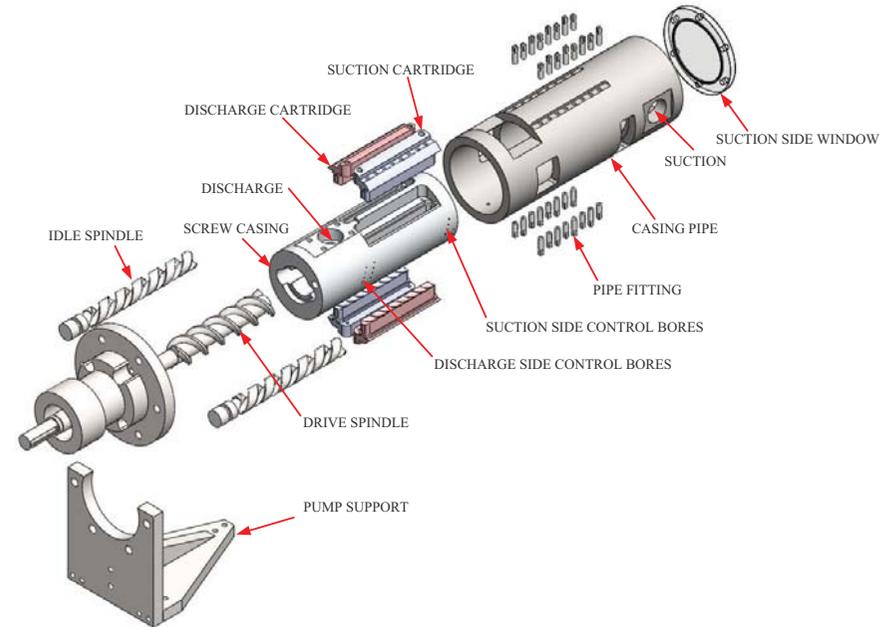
Exploded assembly drawing of the screw pump with the added compensation system.
